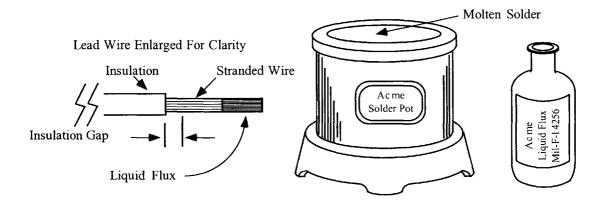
Using the Solder Pot to Dip Tin Leads.
